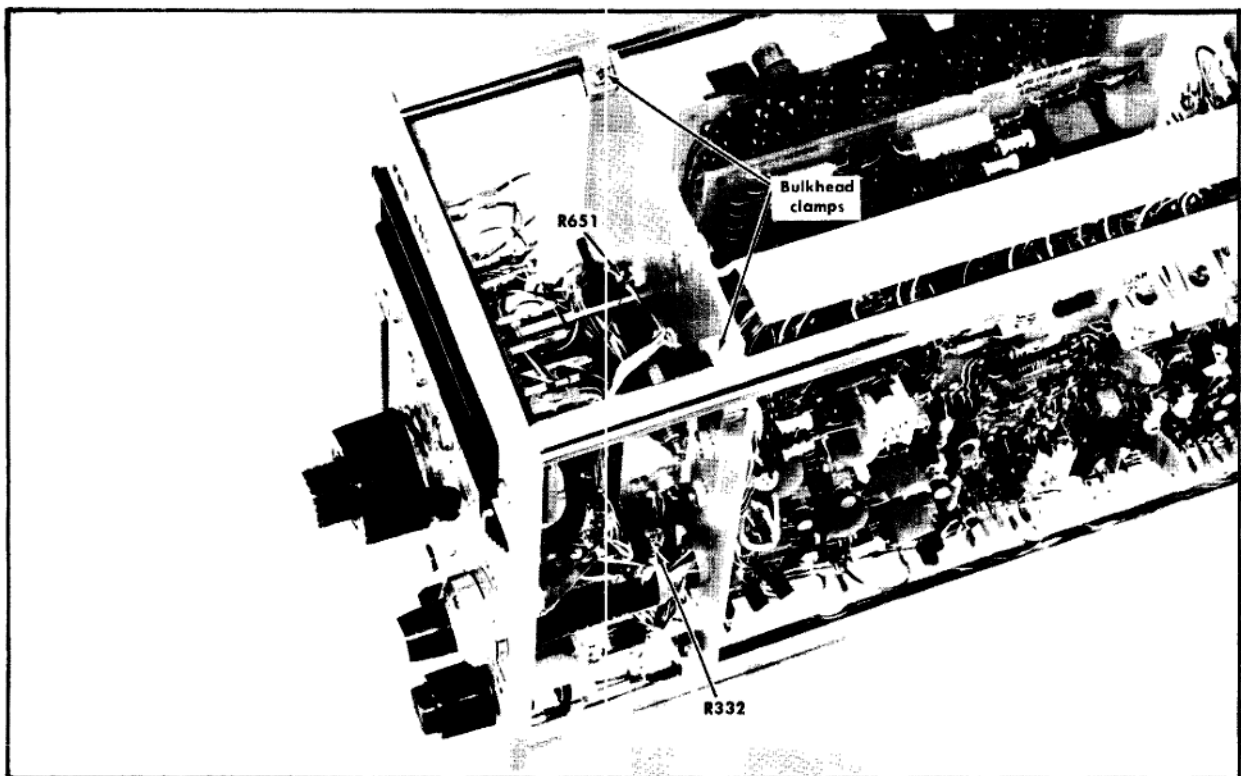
Partial disassembly of the Type 3B5 to allow access to components mounted on the subpanel.
